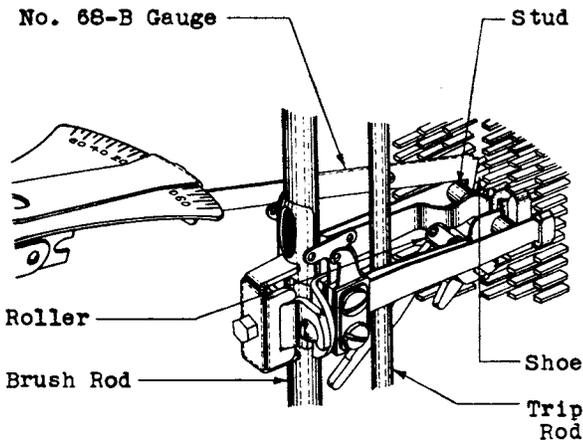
Method of Checking Brush Spring Tension Using No. 68-B Gauge
